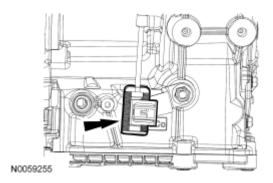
Connecting Selector Lever Cable End To Manual Lever Courtesy of FORD MOTOR CO.
